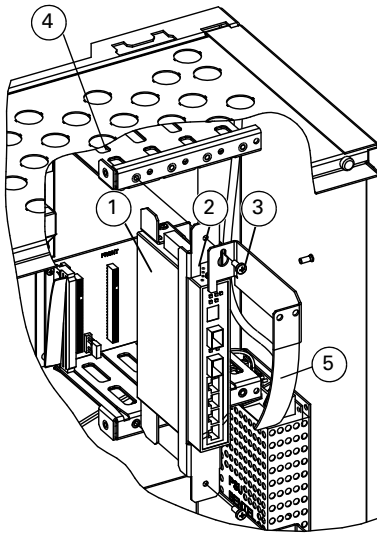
Mounting the Ethernet switch and slot cage holder into the slot cage.
